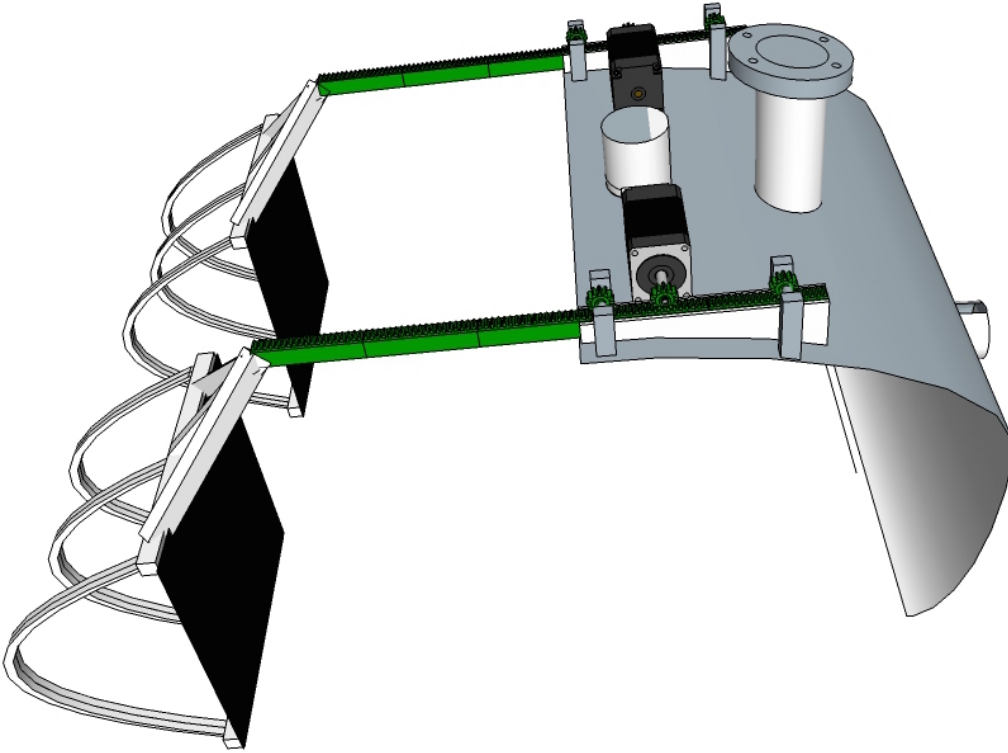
First prototype 3D-drawing of gripper 1.
